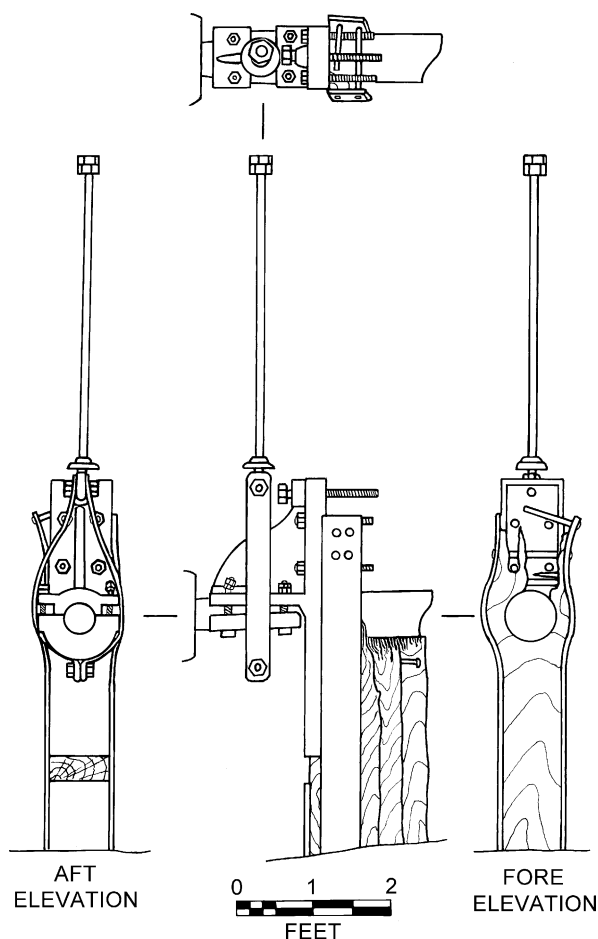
Plan, starboard elevation, fore and aft views of adjustable stern bearing assembly. Drawing by Jim Bradford
